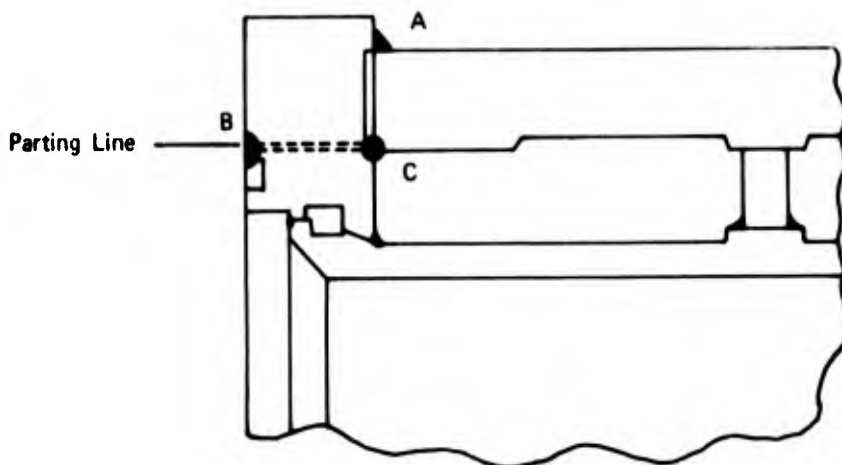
Method of Removal and Rewelding of Fuel Turnaround Manifold FD 53751
